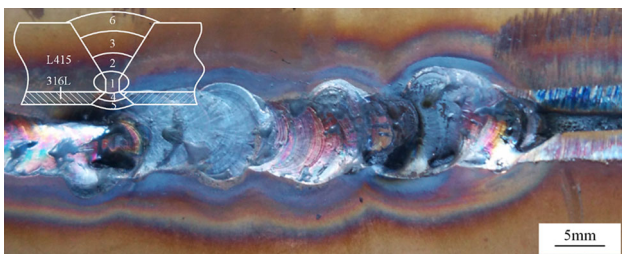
Weld pool collapse after 4th and 5th weld bead of groove A
